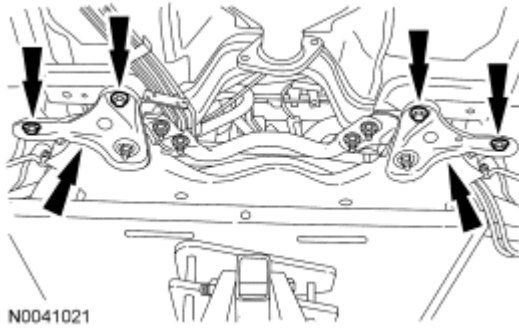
Locating Subframe Support Brackets And Bolts
